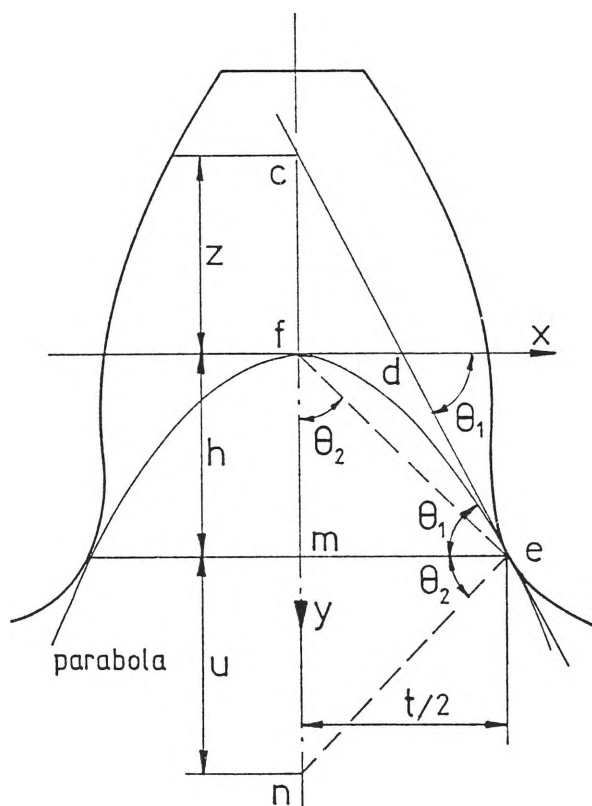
LAMBDA METHOD TOOTH DIMENSIONS
